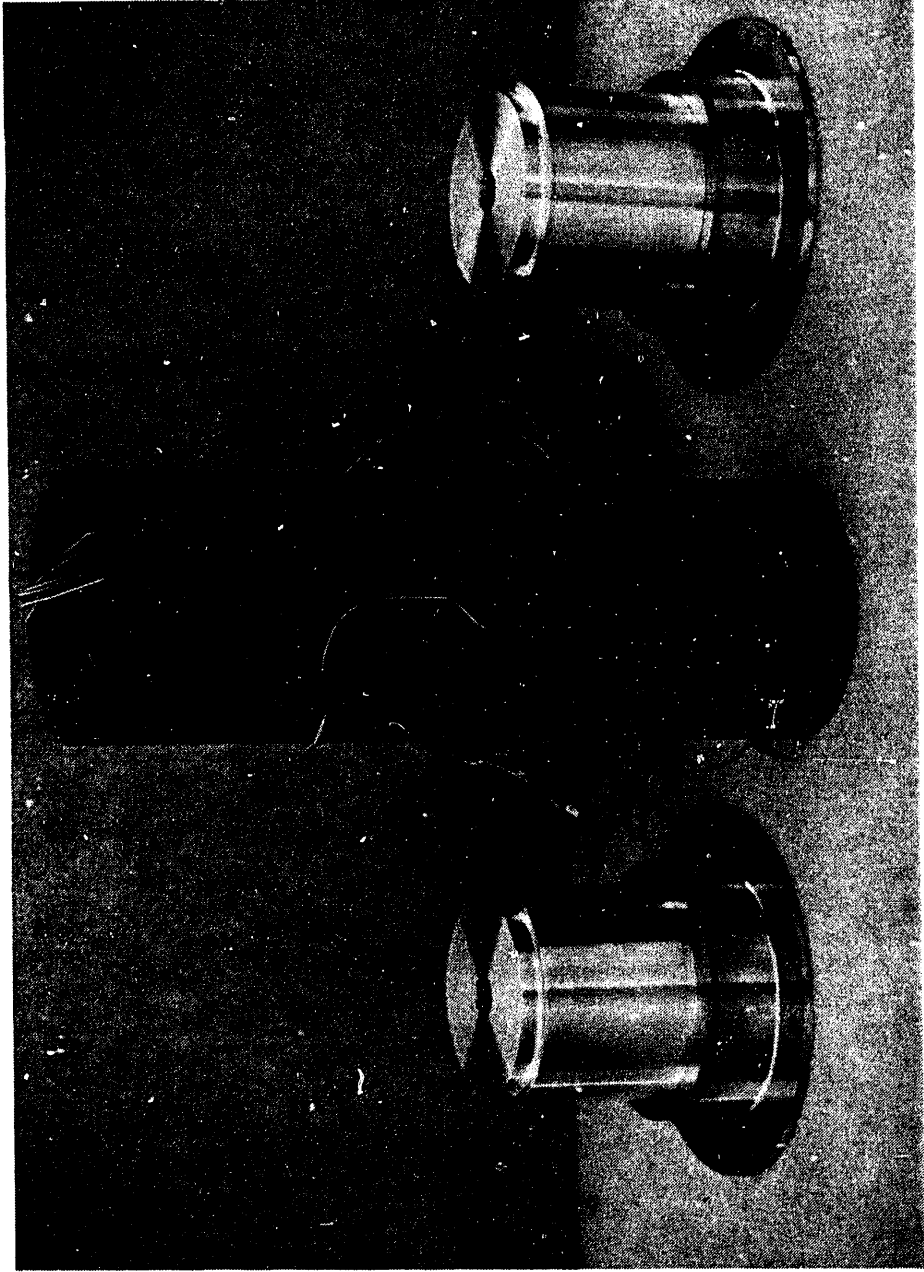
Test cylinder C6-1 and steel and aluminum end closures.
